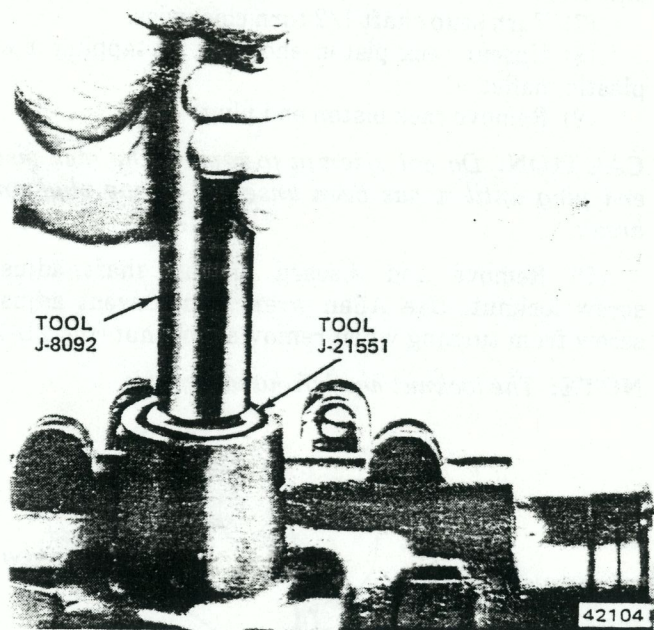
L-18 Pitman Shaft Bearing Removal/Installation
